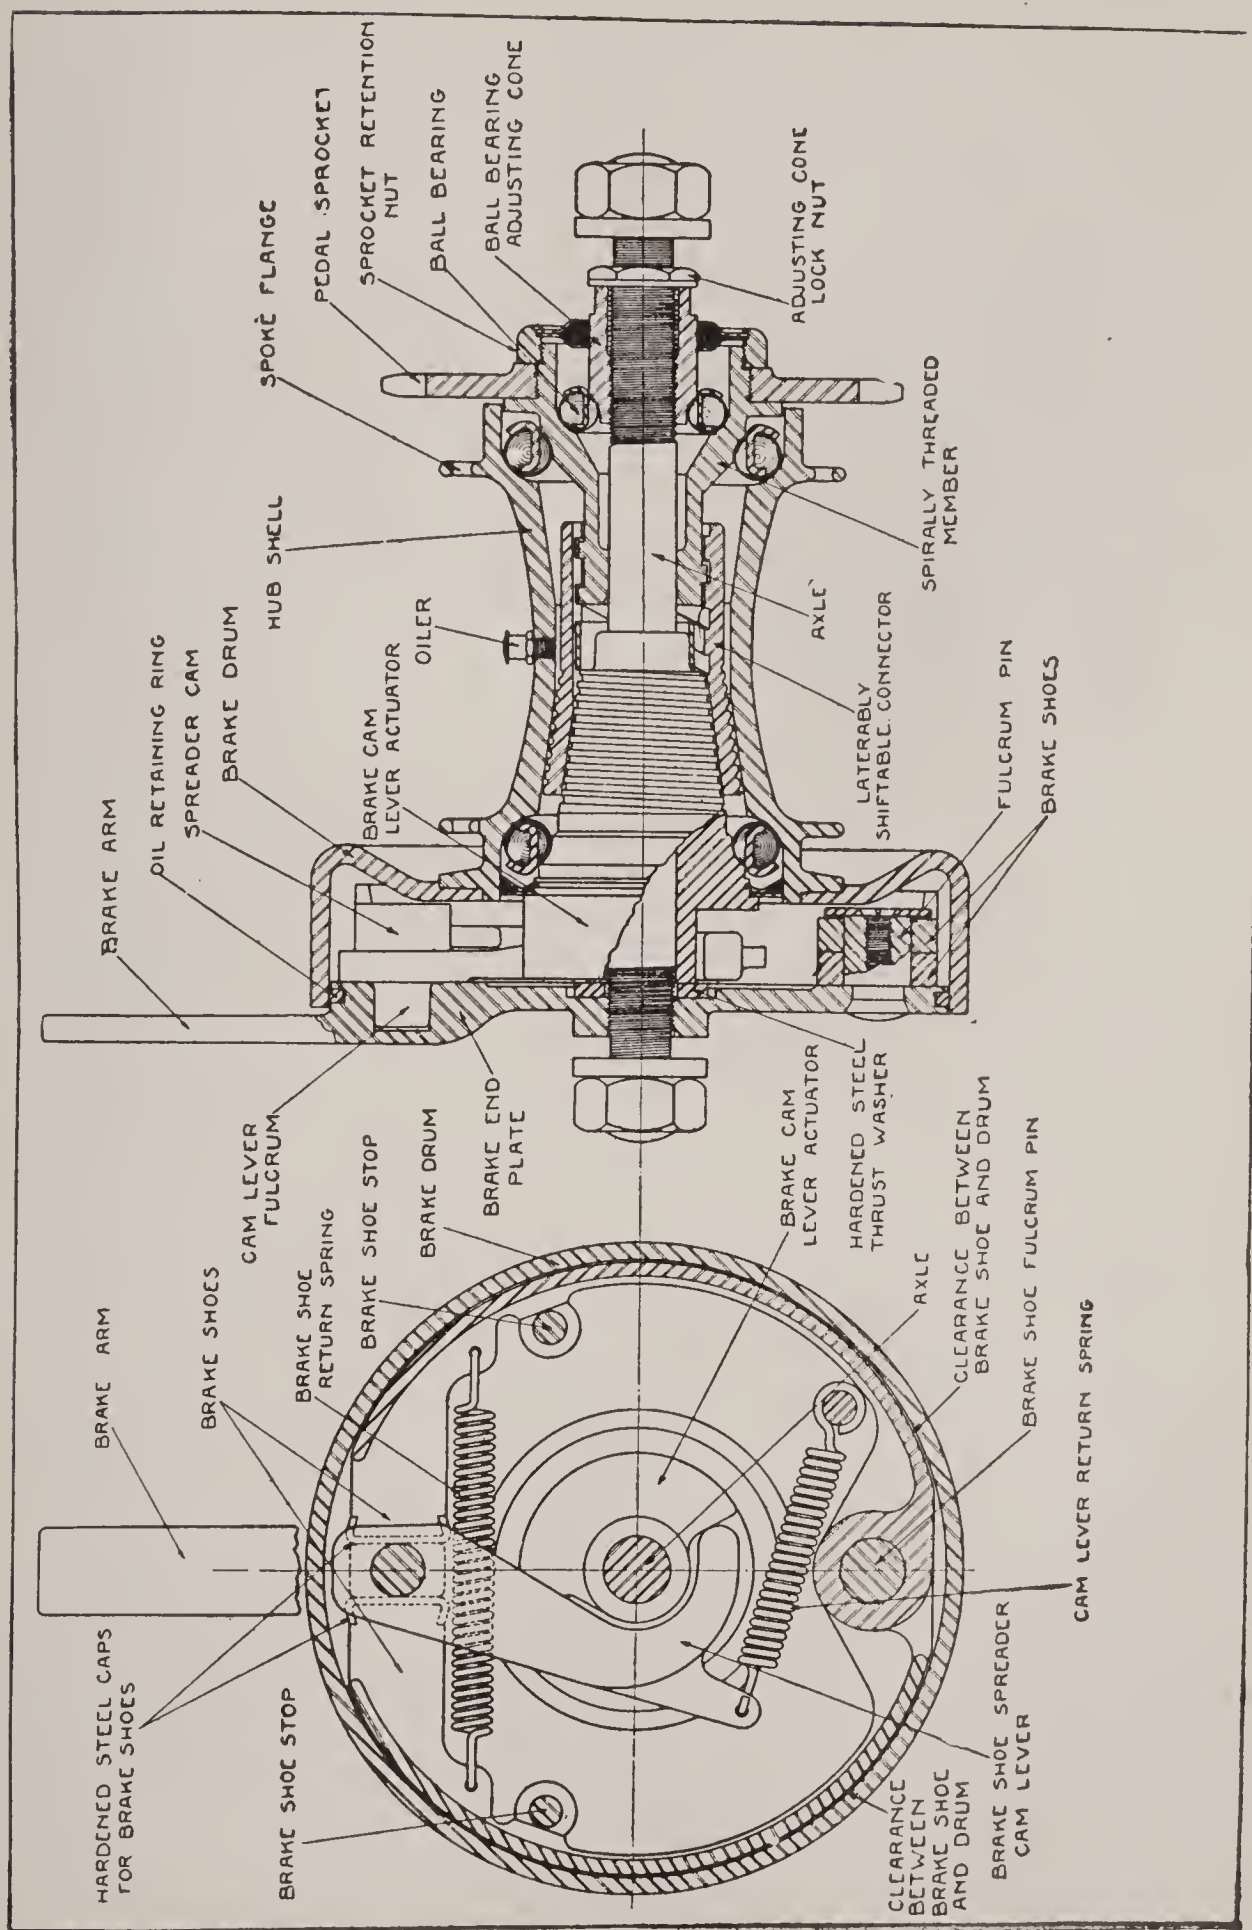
Sectional View, Showing Interior Construction of New Departure Model L Coaster Brake.
